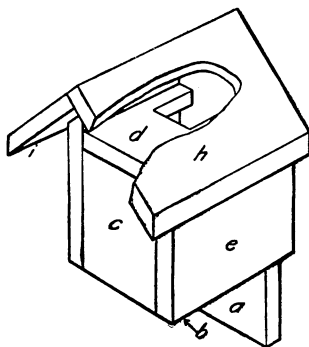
House for wrens and house finches. Roof broken to show interior.
